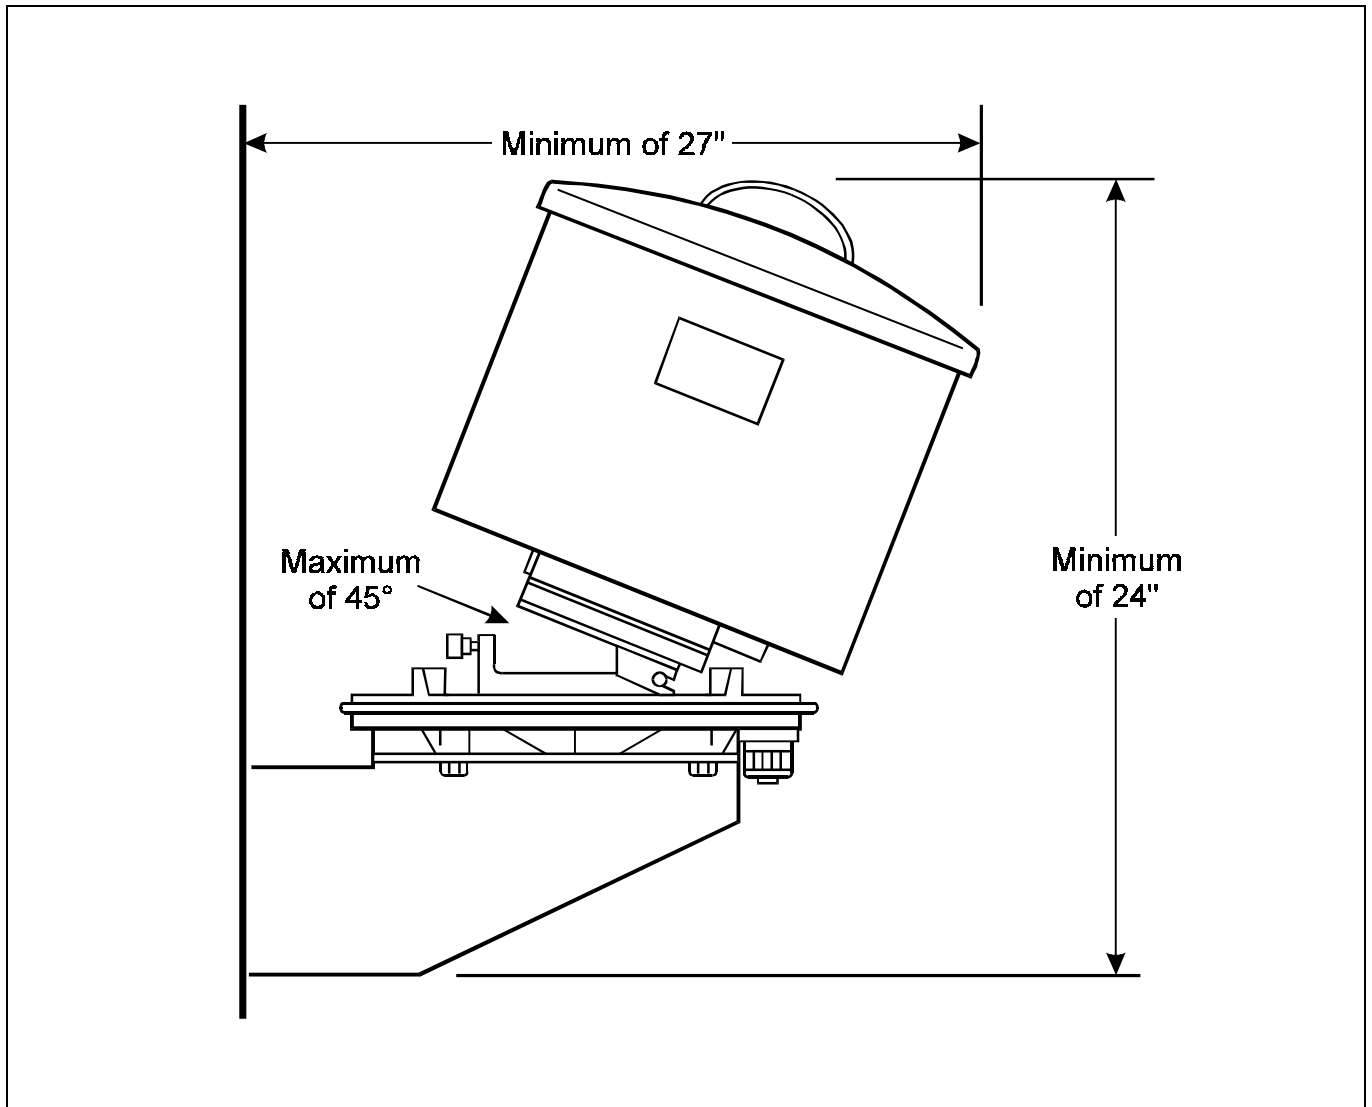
Flat-Surface Mounted Enclosure. This illustration shows the mounting dimensions for flat surface-mounted enclosures.
